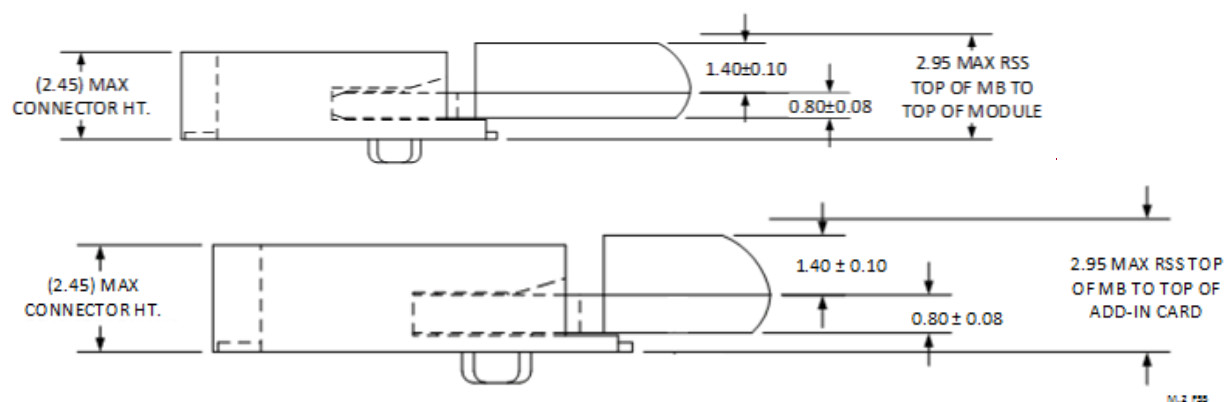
H2.5-S3 - Stack-up Top Mount Single-sided Add-in Card for 1.5 Maximum Top-side Component Height and with Higher Clearance above ~~Motherboard~~Motherboard
